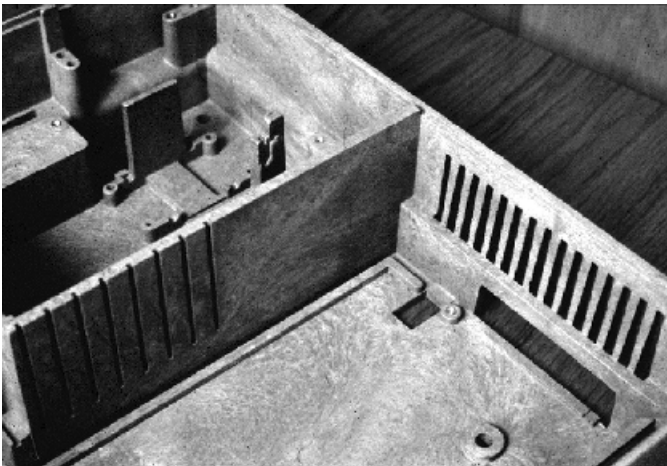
Low-pressure structural foam louvers and weld line.
